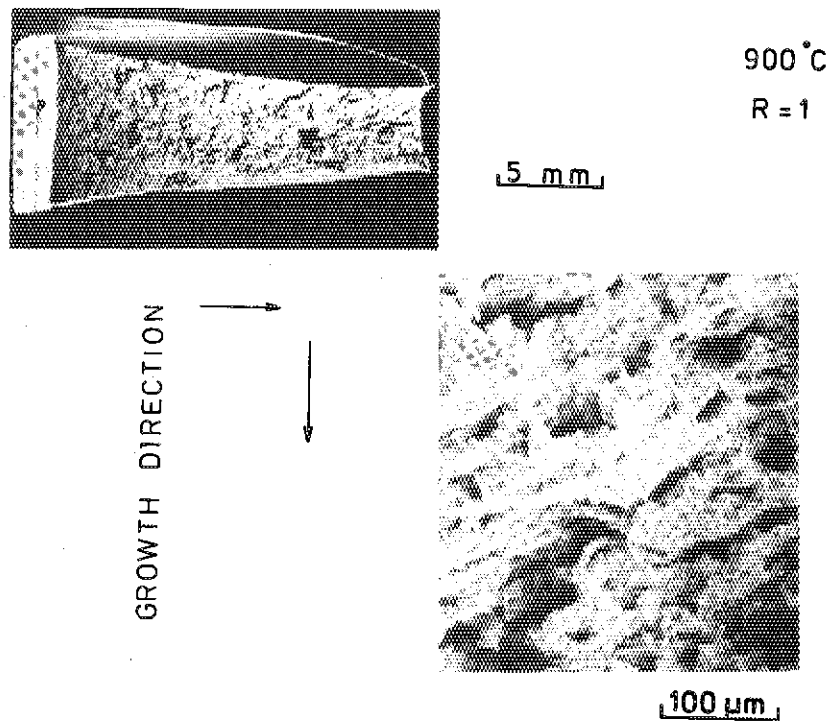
Appearances of fractured surface (S.E.N., 900°C, R=1)
